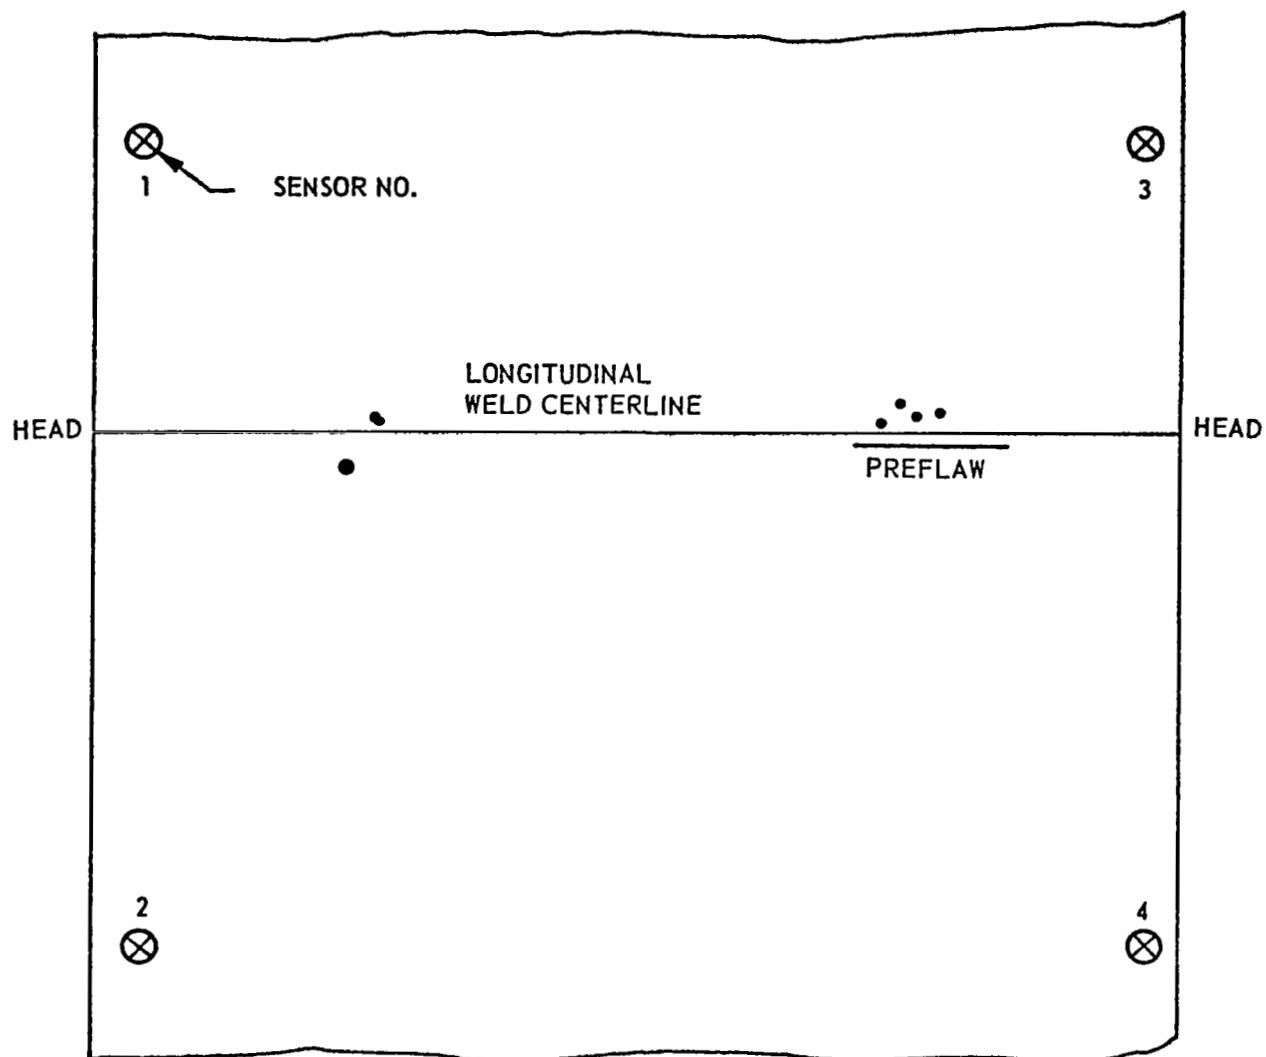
Location of SWE Sources Detected When Pressurizing (3rd Cycle) the 2219-T87 Aluminum Vessel to 1000 psi at -320°F. Weld Preflaw Location also Shown.
